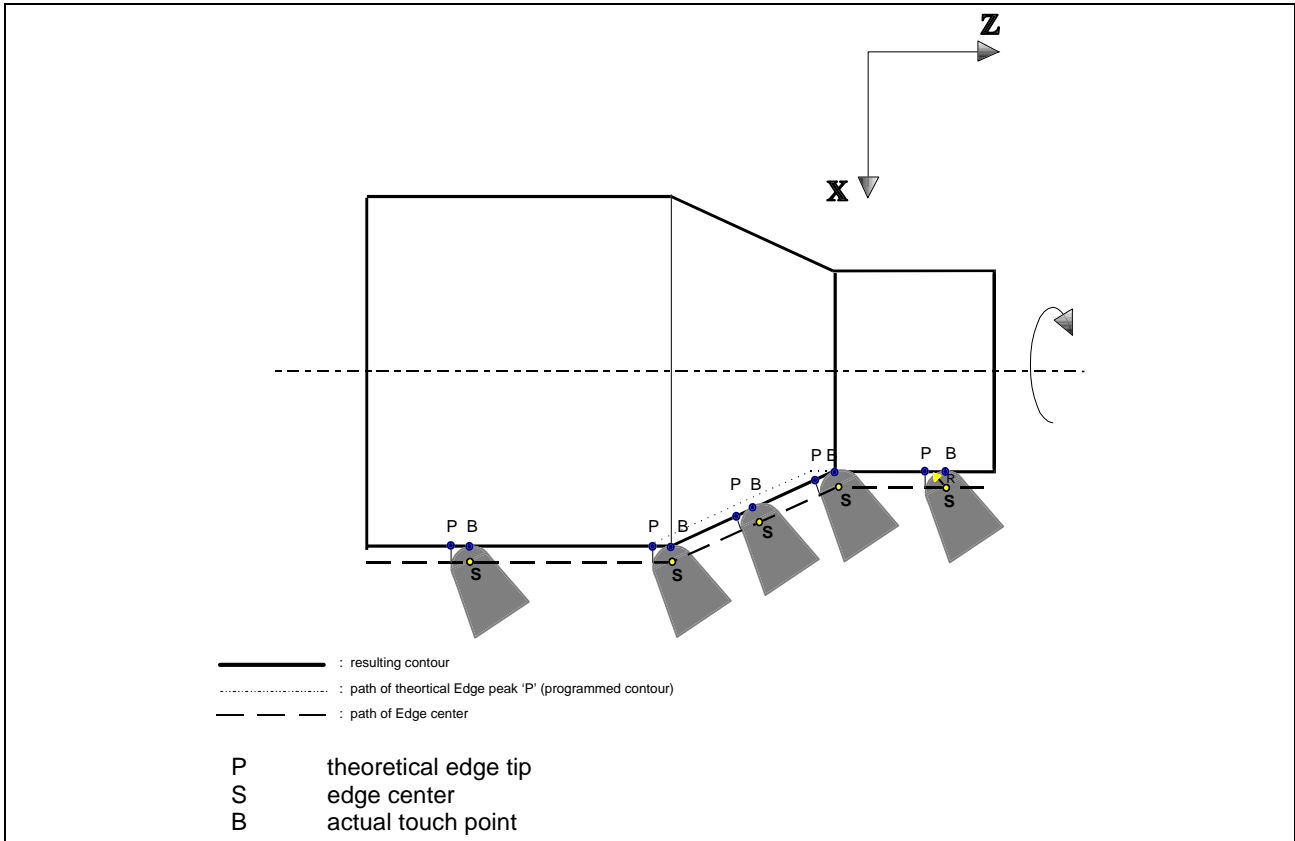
Error-free machining with tool edge radius path compensation active.
